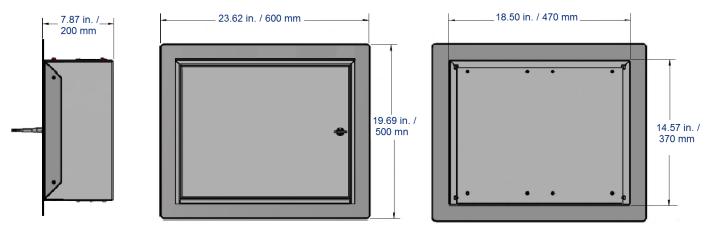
SINGLE SK Enclosure Overall Dimensions with Decorative Trim Frame
